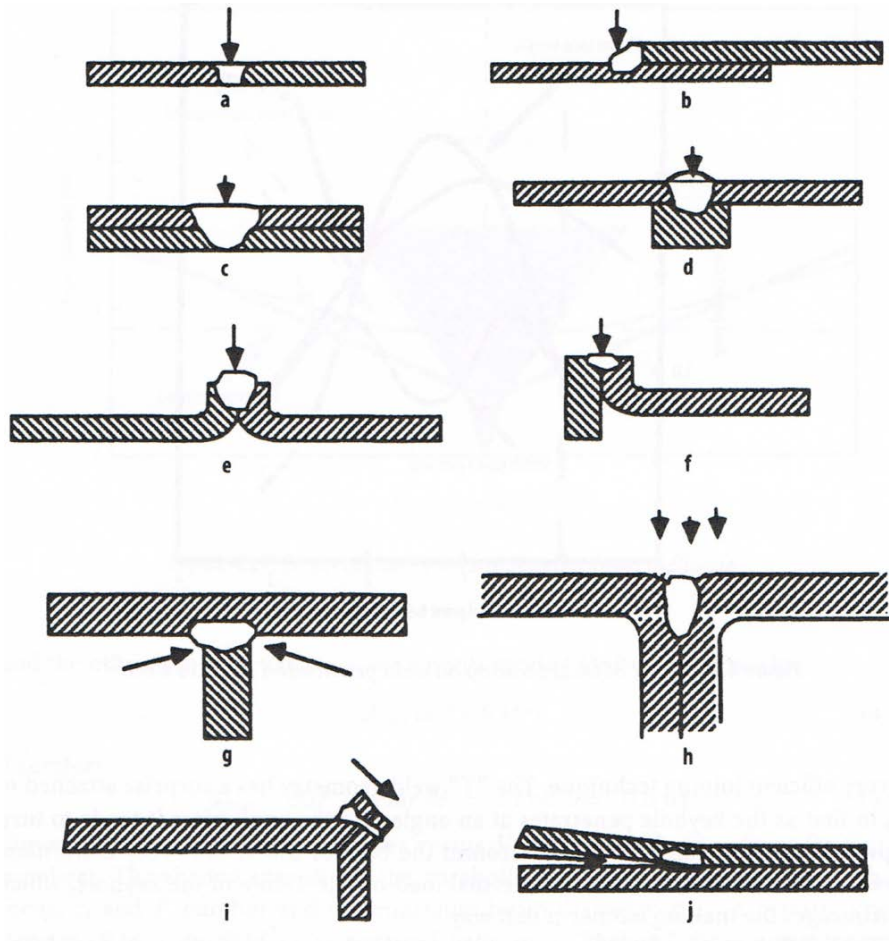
Various welding joint arrangements. *a* butt joint; *b* fillet or lap joint; *c* spot or lap weld; *d* spike or spot weld; *e* flange joint; *f* edge joint; *g* T-joint; *h* flare weld; *i* corner; *j* kissing or flare weld.
